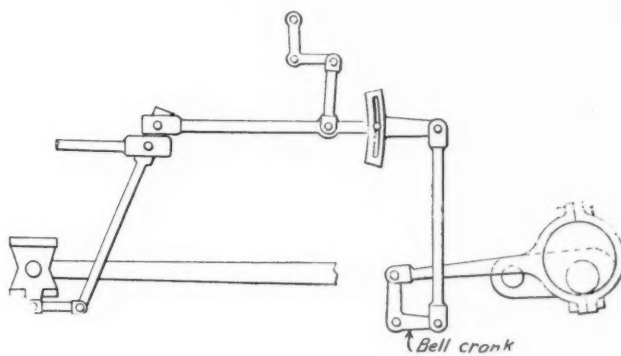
Valve Gear as Applied to P. L. M. 4-8-0 Type
